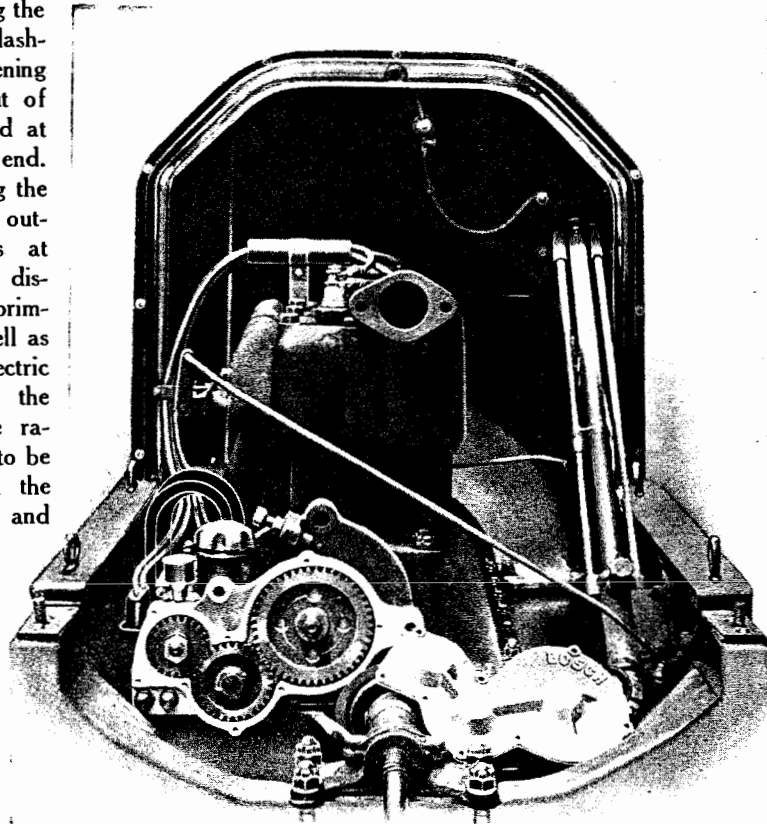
Attachment in Place. Cables Connected and the Gear Covering Ready to be Placed.
